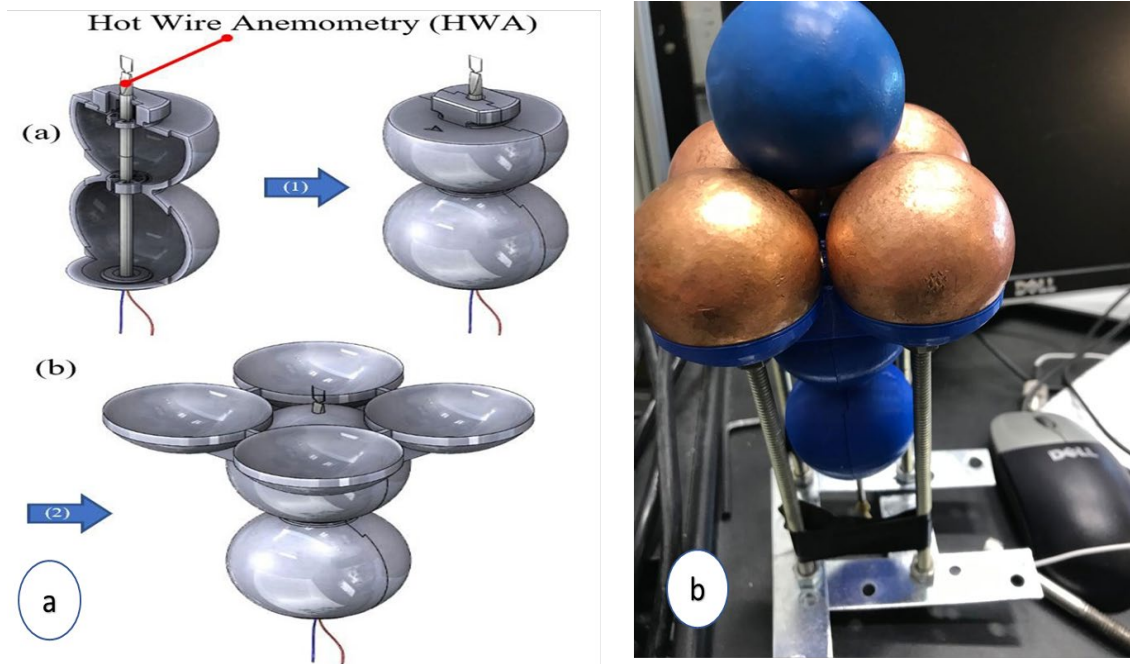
Assembly of the designed probe-protector case: a) a 3D design, b) a picture of the complete assembly.
